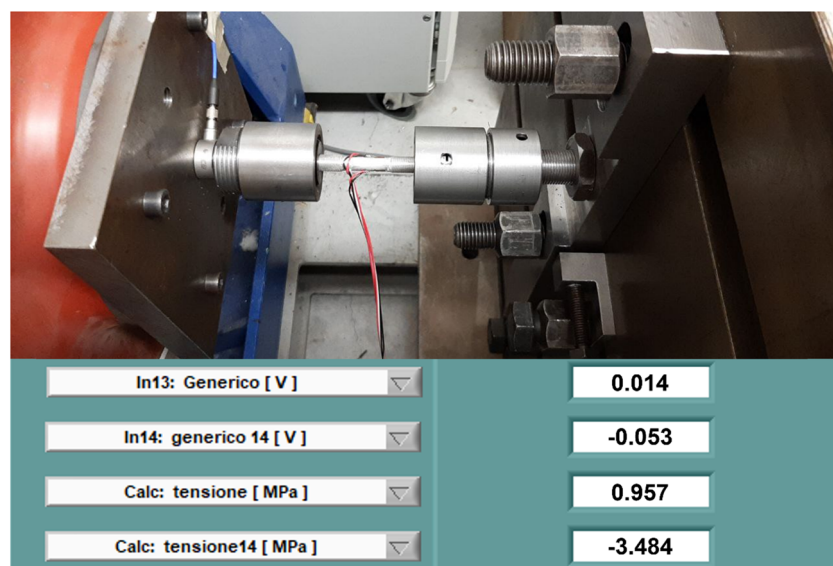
Mounting of a specimen with two strain gauges to ensure coaxiality of the test
